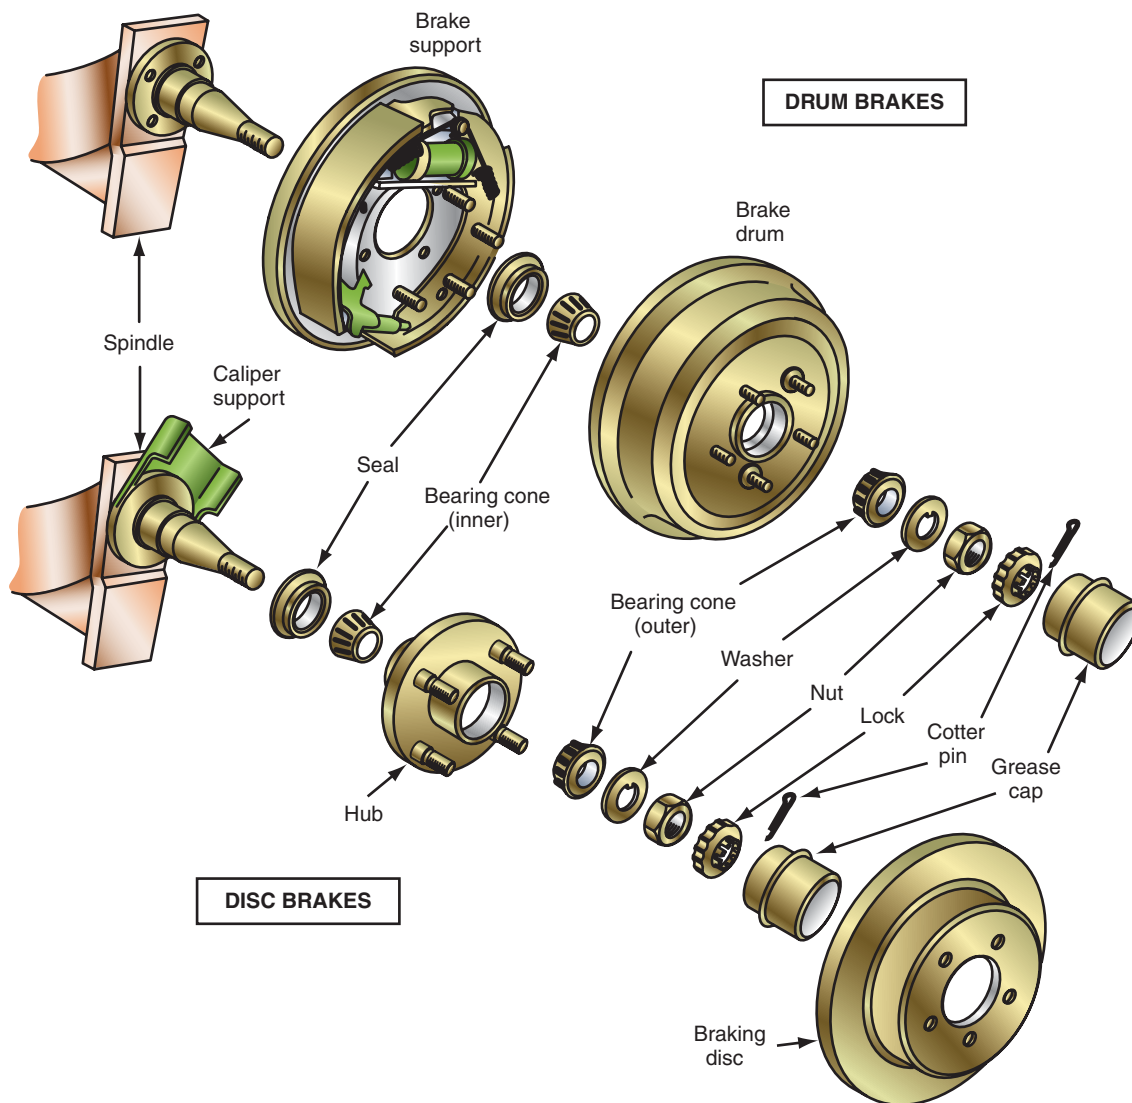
Rear wheel hub with tapered roller bearings for drum or disc brakes, front-wheel-drive car.
